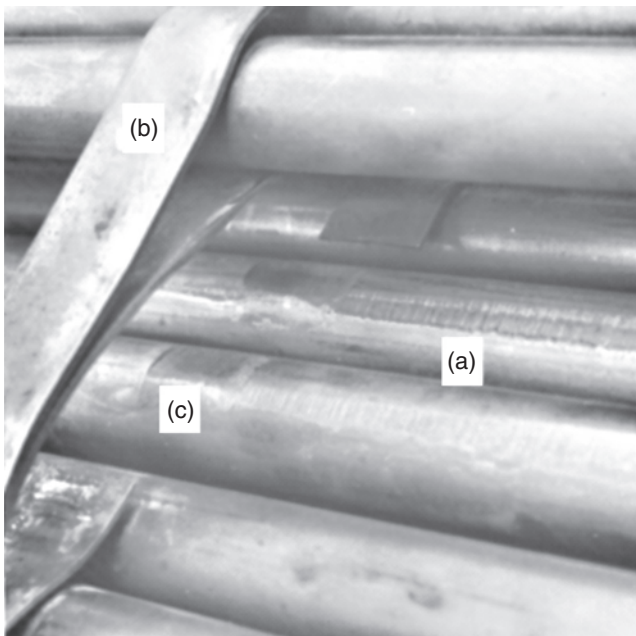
Fretting Wear in the Inlet Region of a Liquid Process Heat Exchanger: a) Tube-to-Tube Initial Damage, b) Lacing Strip, and c) Damage at Lacing Strip Location (Pettigrew, 1976).
